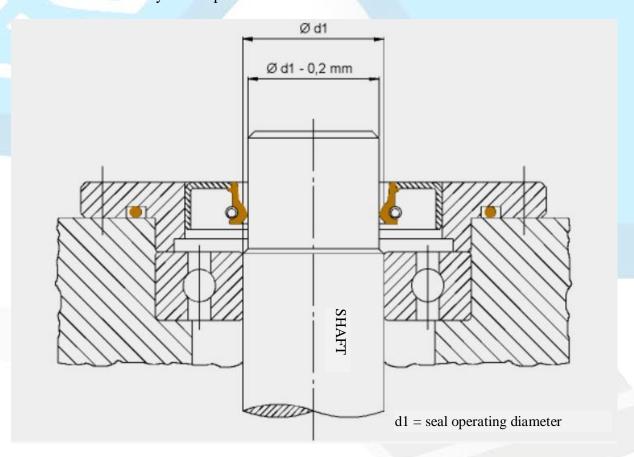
Seal shaft diameter that should be if the bearing is driven in the desired sealing area
